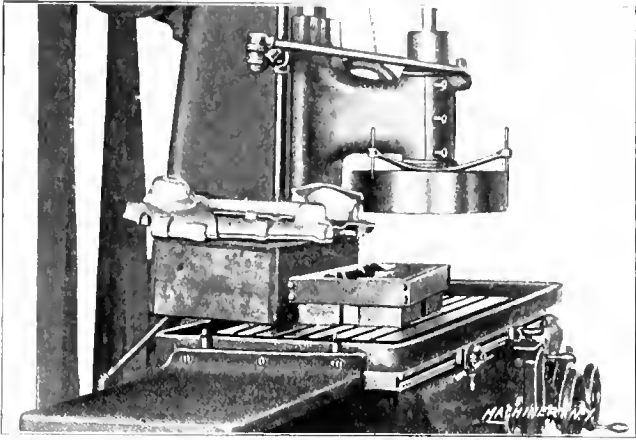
The Acme of Simplicity in Fixture Making. Face Grinding the Steering Gear Casing
